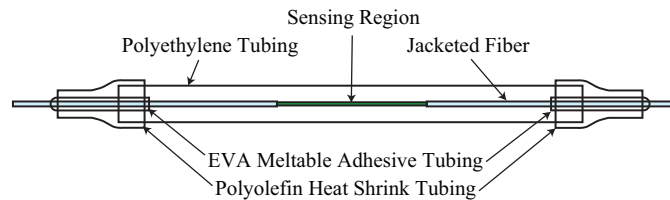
Illustration of the D-fiber packaging showing the various components.
